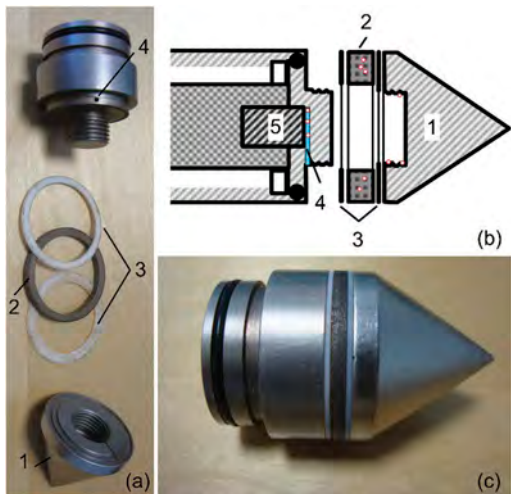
Piezocone tip: (a) disassembled, (b) schematic cross section showing likely location of air bubbles and (c) assembled tip. 1 piezocone tip, 2 porous filter, 3 seals, 4 chamber connecting porous filter to pore pressure transducer and 5 pore pressure transducer.
